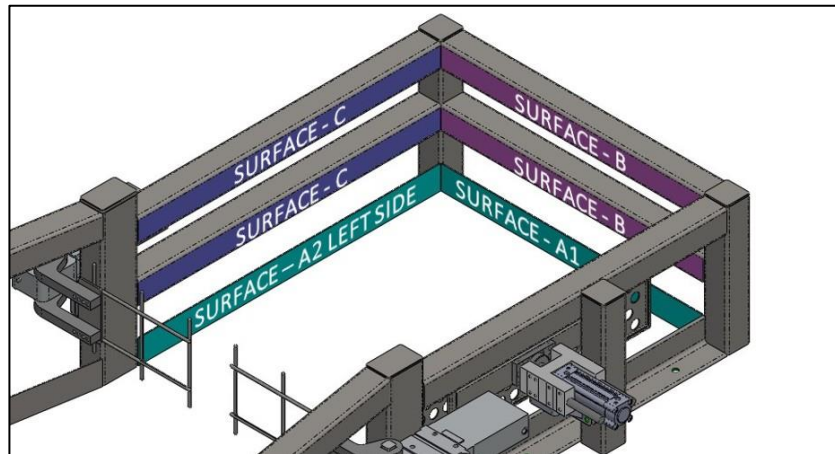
Reference surfaces of the Crates' Positioning Equipment.
